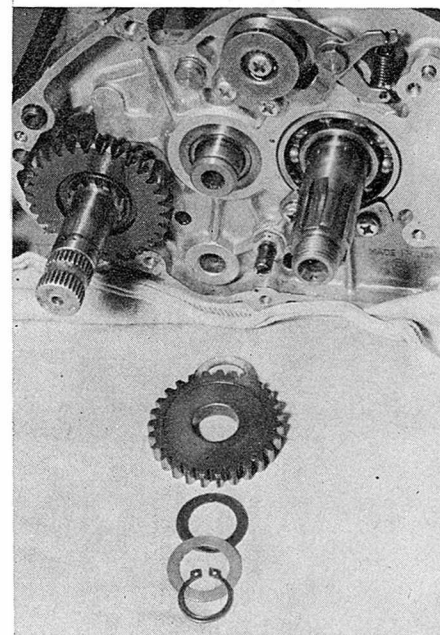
Arrangement of thrust washers on kick starter idle gear on F5 model. F8 does not have washer beneath gear. 175 and 125cc models have two thrust washers under gear as shown in Fig. K4-11.
